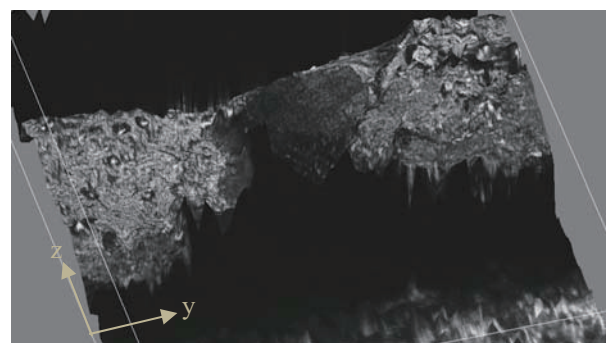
SLM photograph of the fracture surface under the region including the weld defect. (Stereoscopic image)
